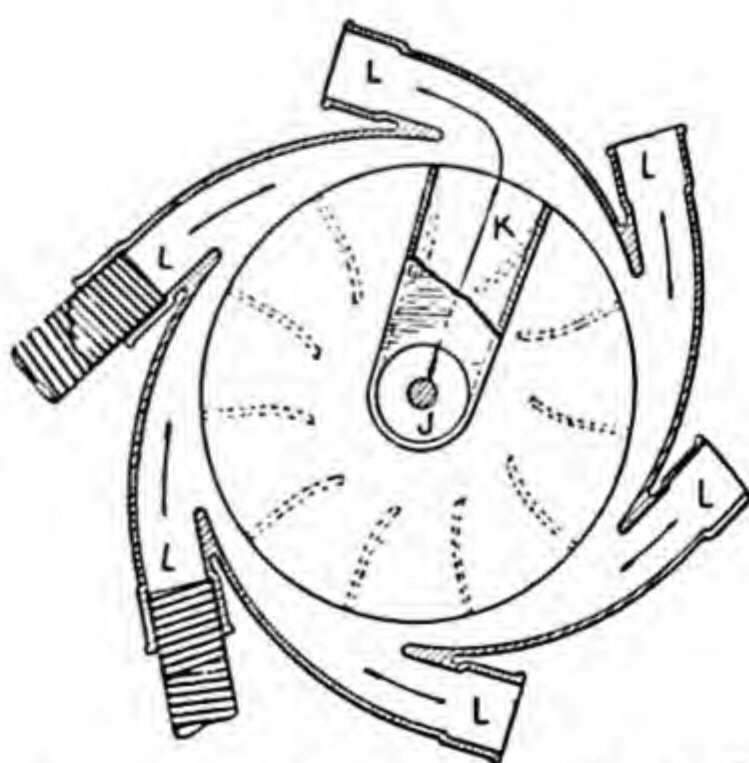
A sectional view of centrifugal discharge fan and fan housing.
